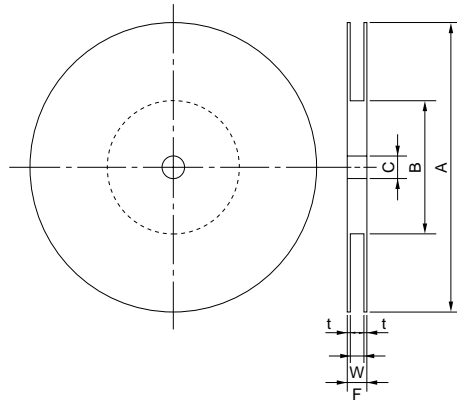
(A). MP-3Z Reel Dimensions (embossed-type taping)
